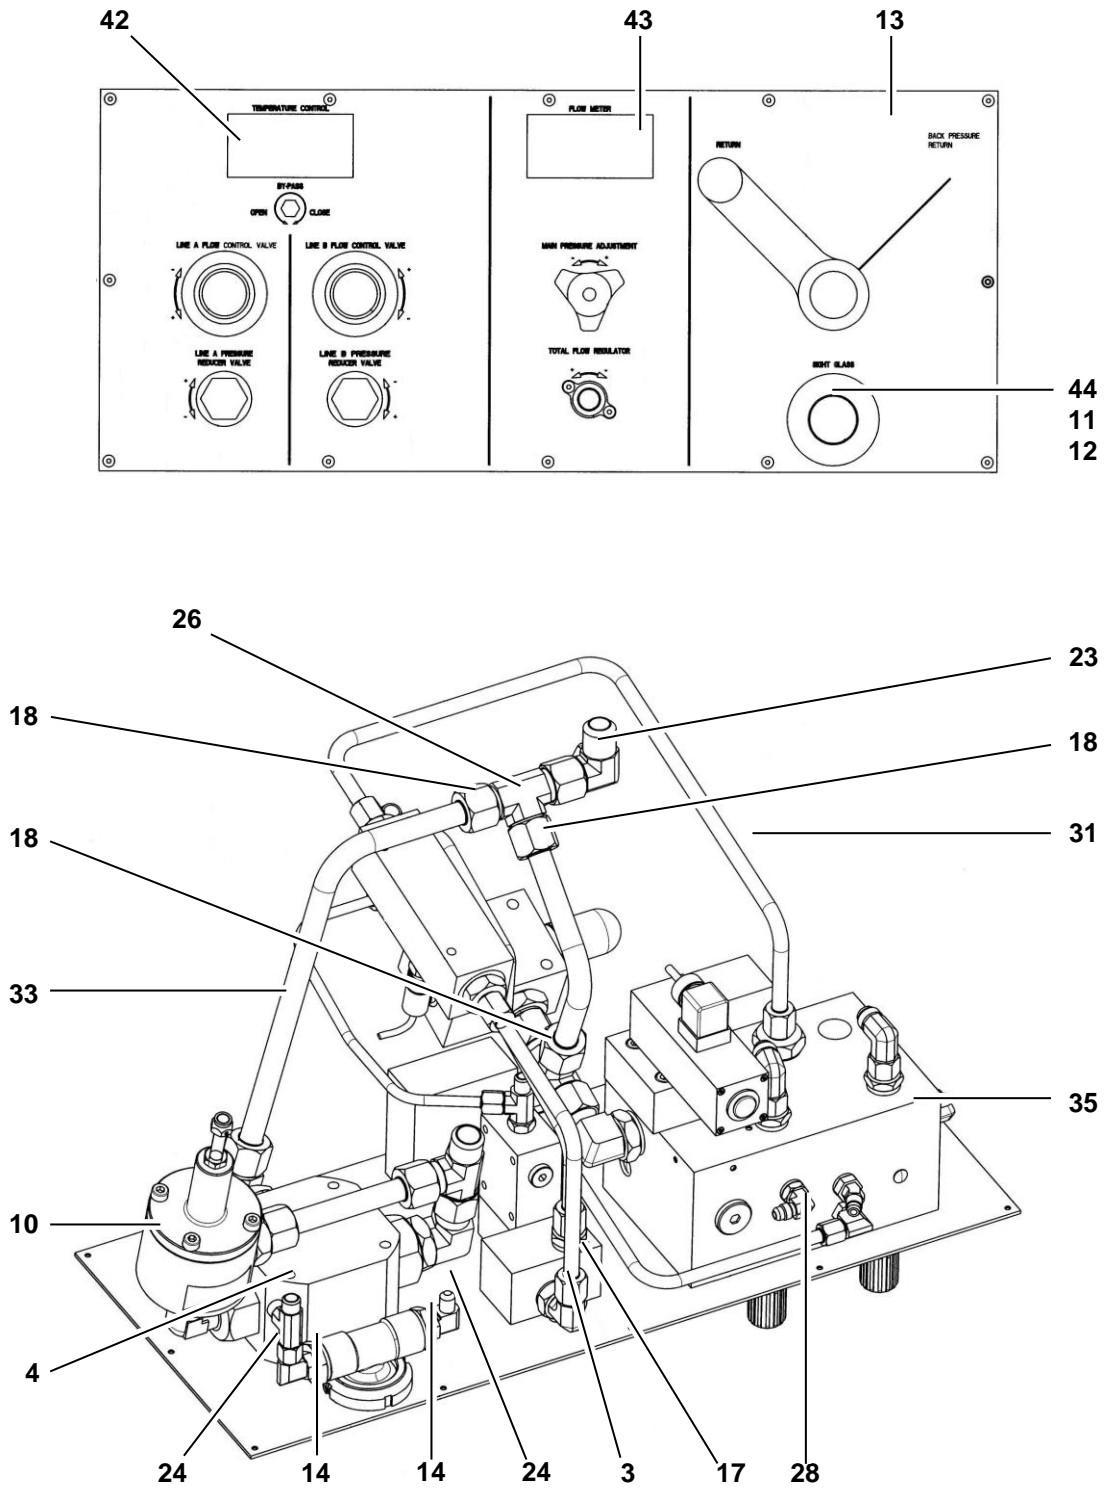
HYDRAULIC CONTROL PANEL (Table 1 of 3)
